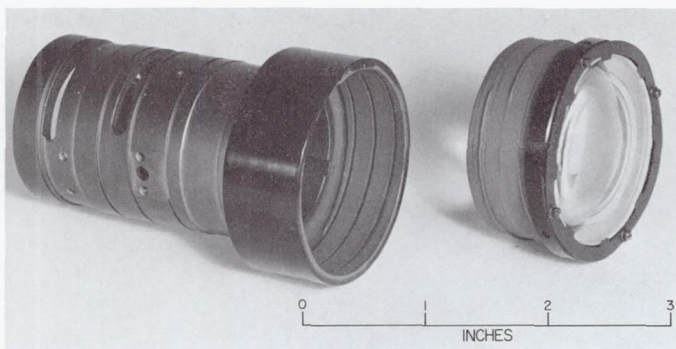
Lens sleeve lubricated with Lubeco 905 before burnishing (R103290)
